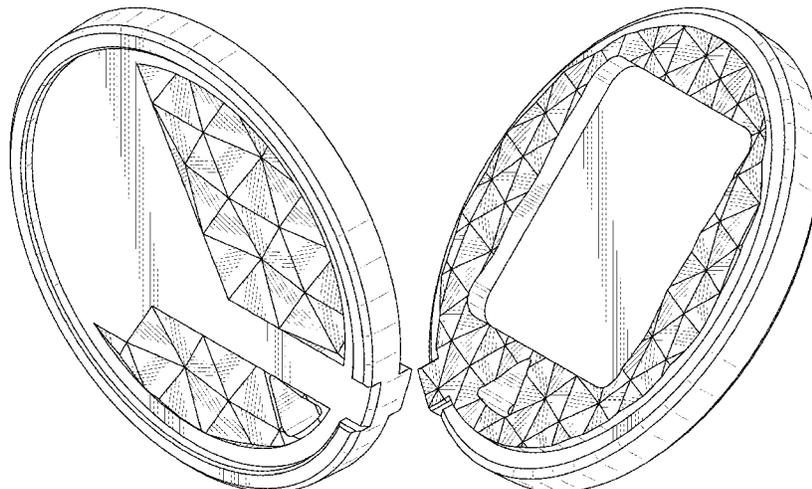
is a front, top, and right side perspective view of a three dimensional faceted identification chip showing our new design;
